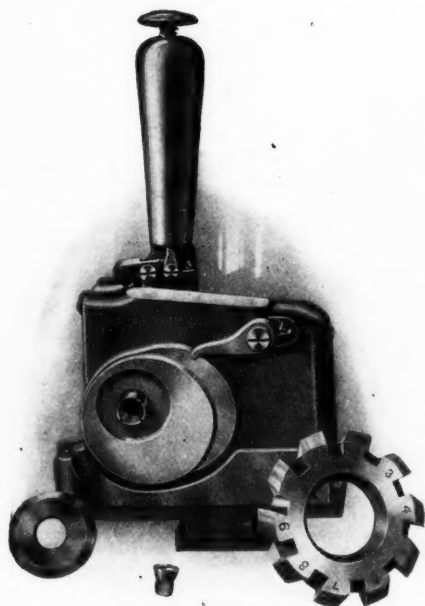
Parts of Rivett-Dock Thread Cutting Tool
